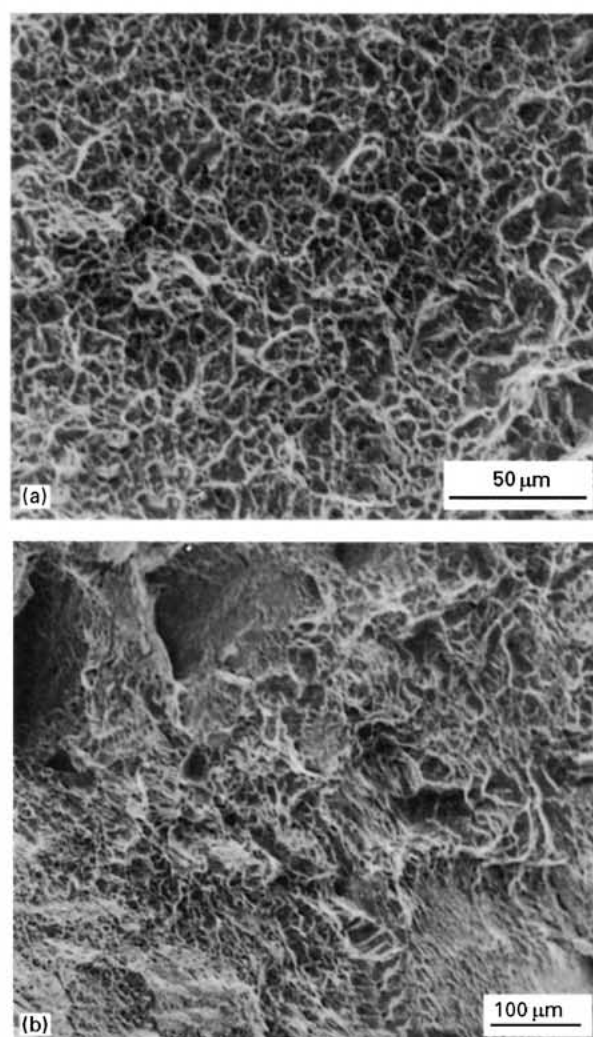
SEM fractographs of fusion zone tensile samples, as-welded condition: (a) electron beam weld; (b) automatic GTA weld.
